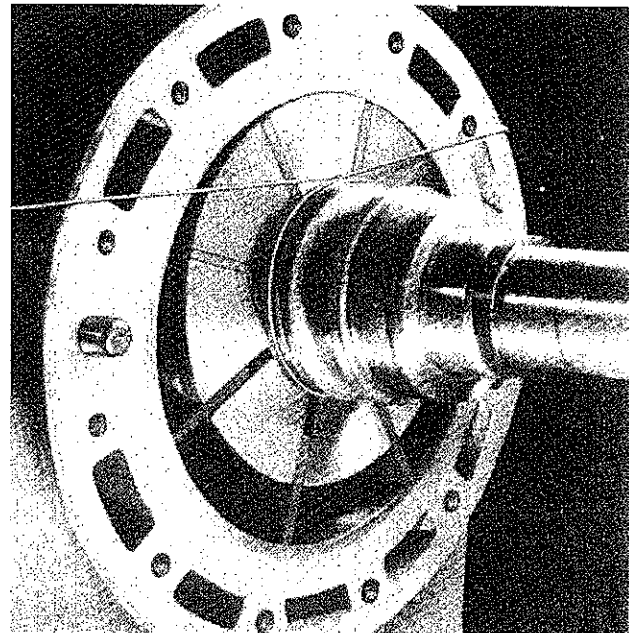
Compressing seal ring prior to replacing cylinder head
